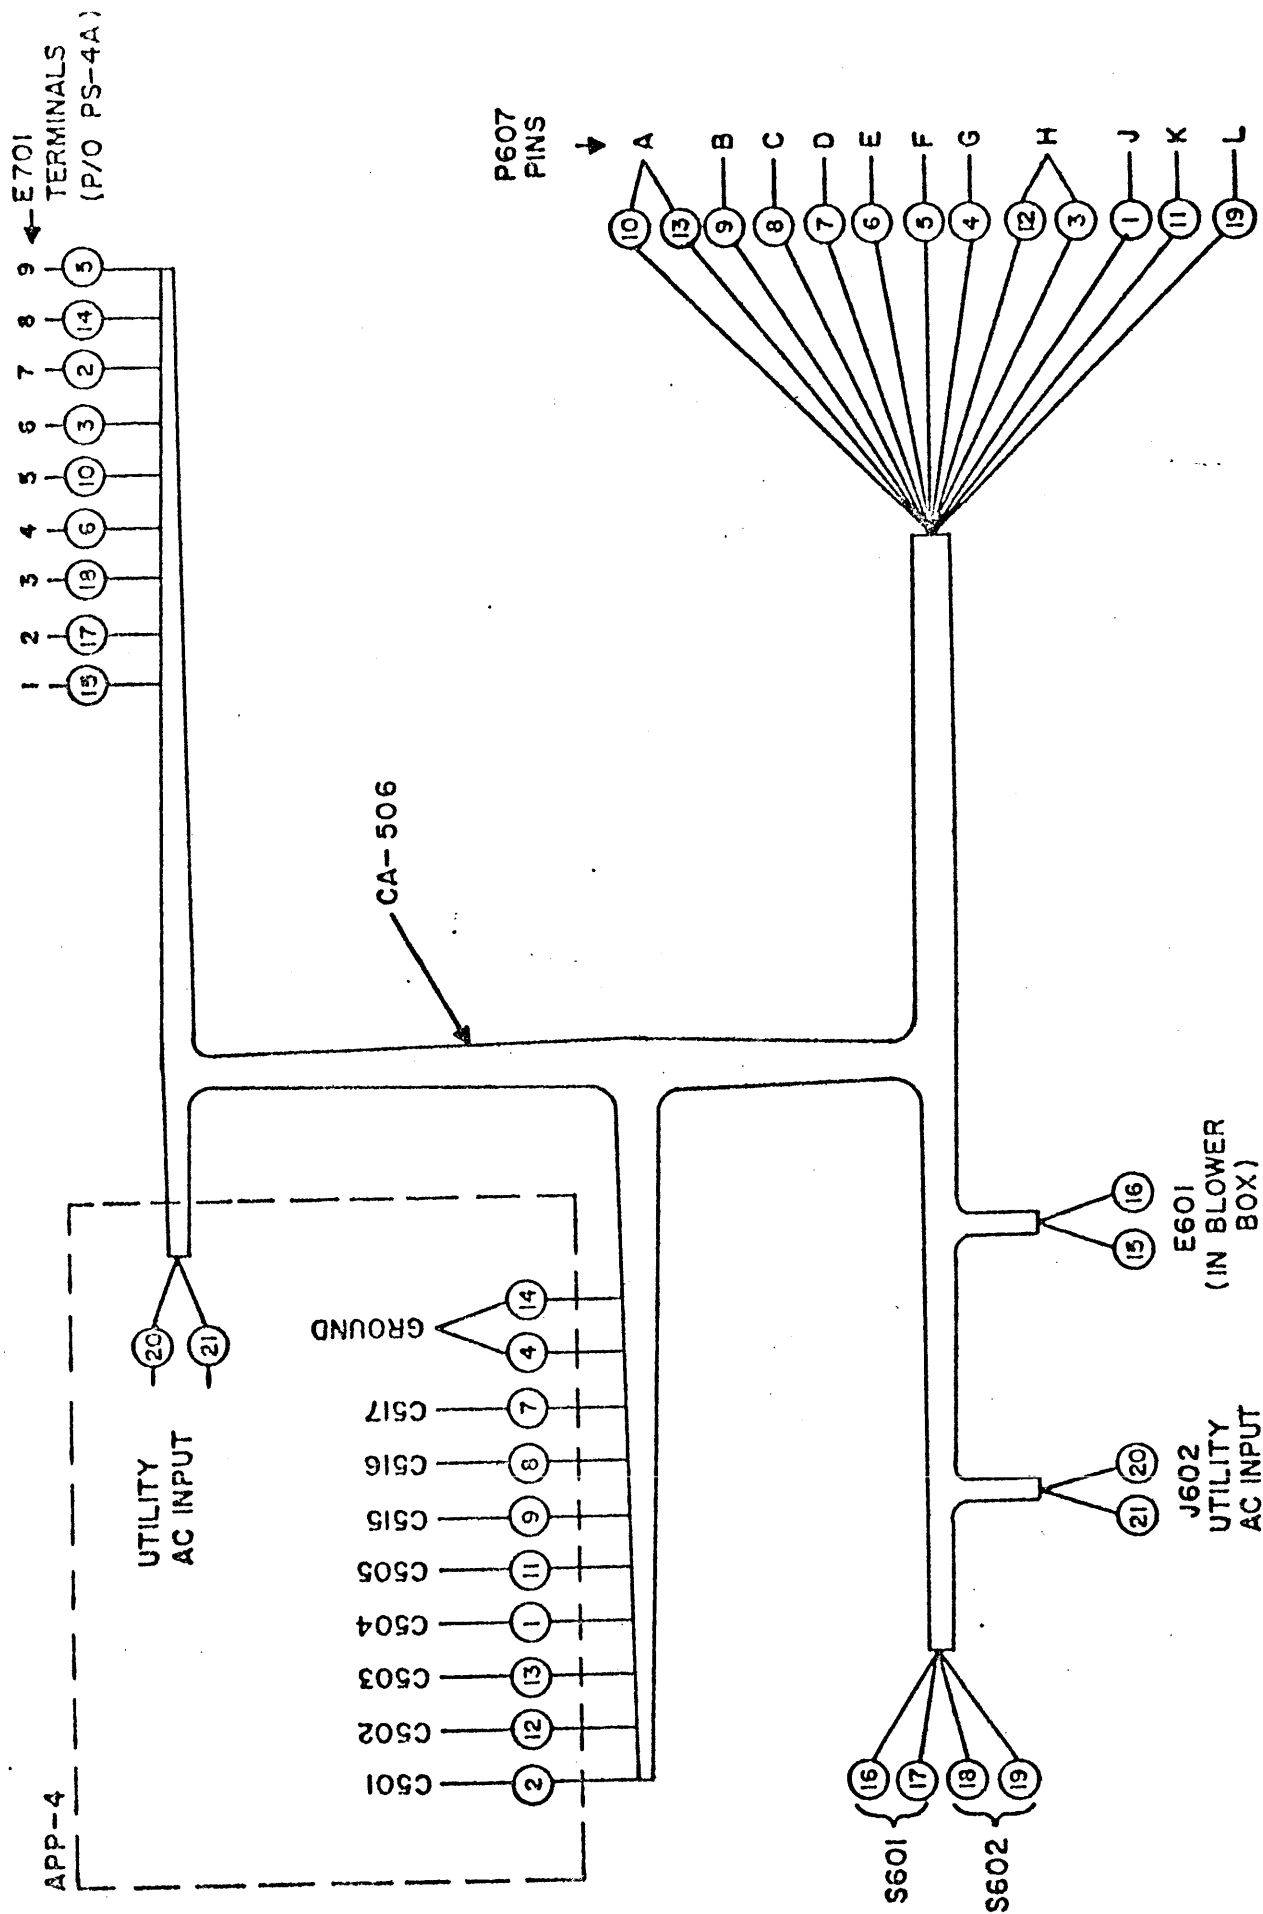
CABLE WIRING DIAGRAM
